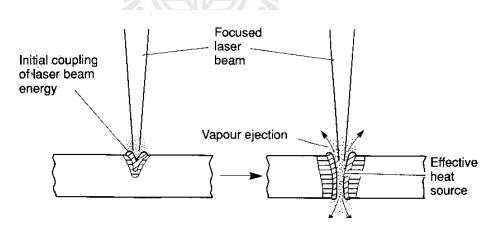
Keyhole welding process (Dawes, 1992).
